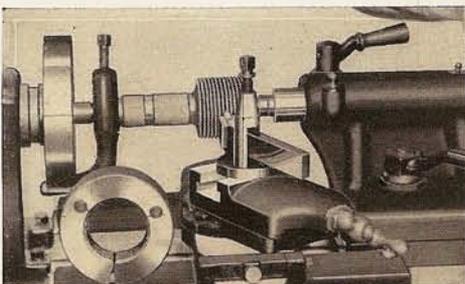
Cutting the Thread on a Master Screw Thread Gauge
